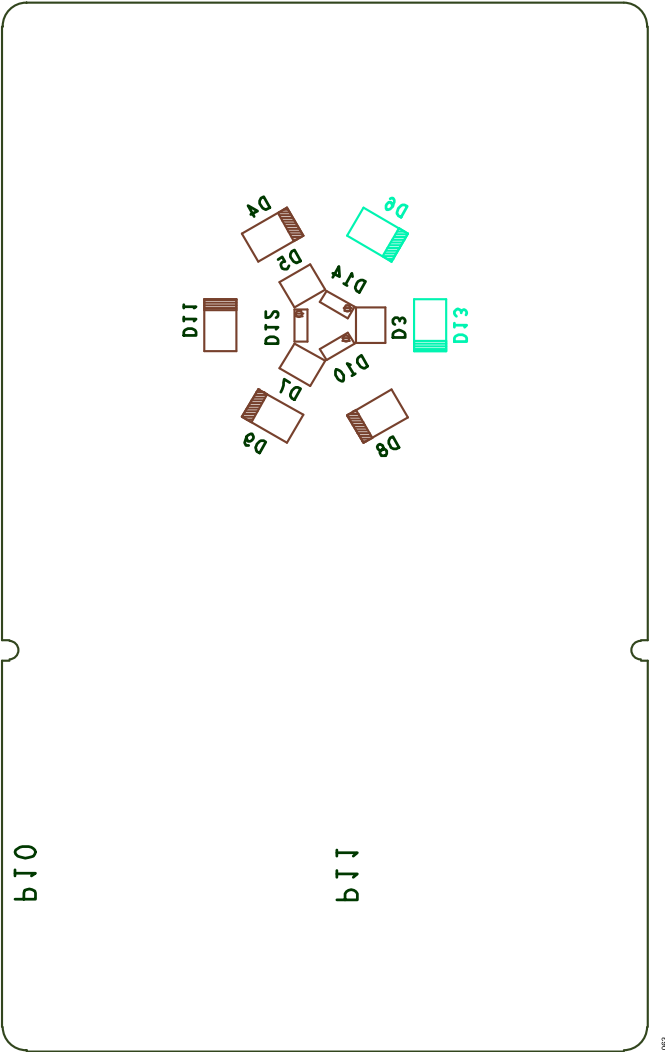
EVAL-ADPD7000Z PCB Layout: Assembly Bottom
